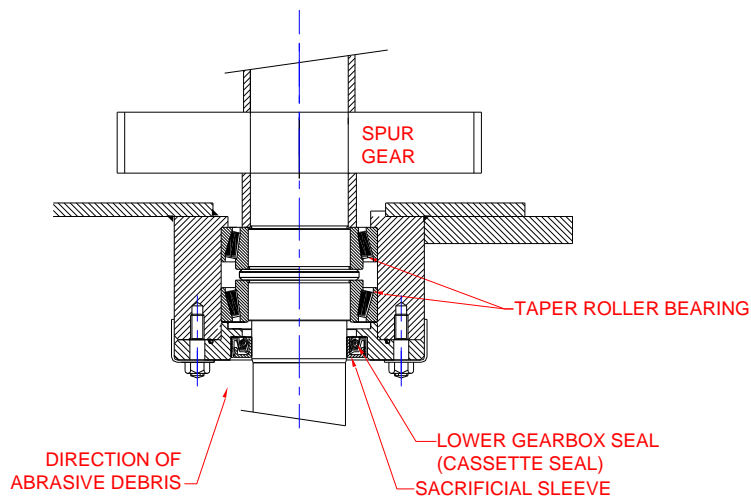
Portion of Gearbox Showing Lower Gearbox Seal [1.1]
